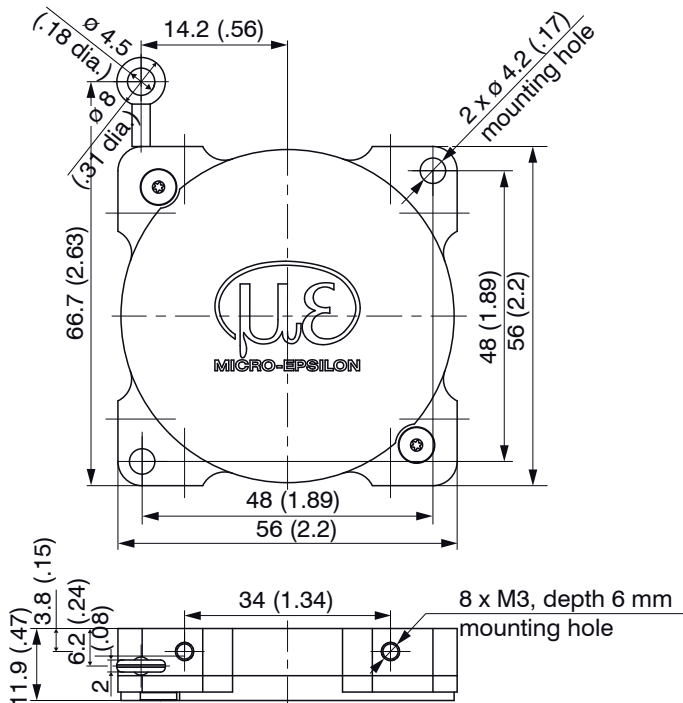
Dimensional drawing WDS-130-MT56-P, dimensions in mm, not to scale
